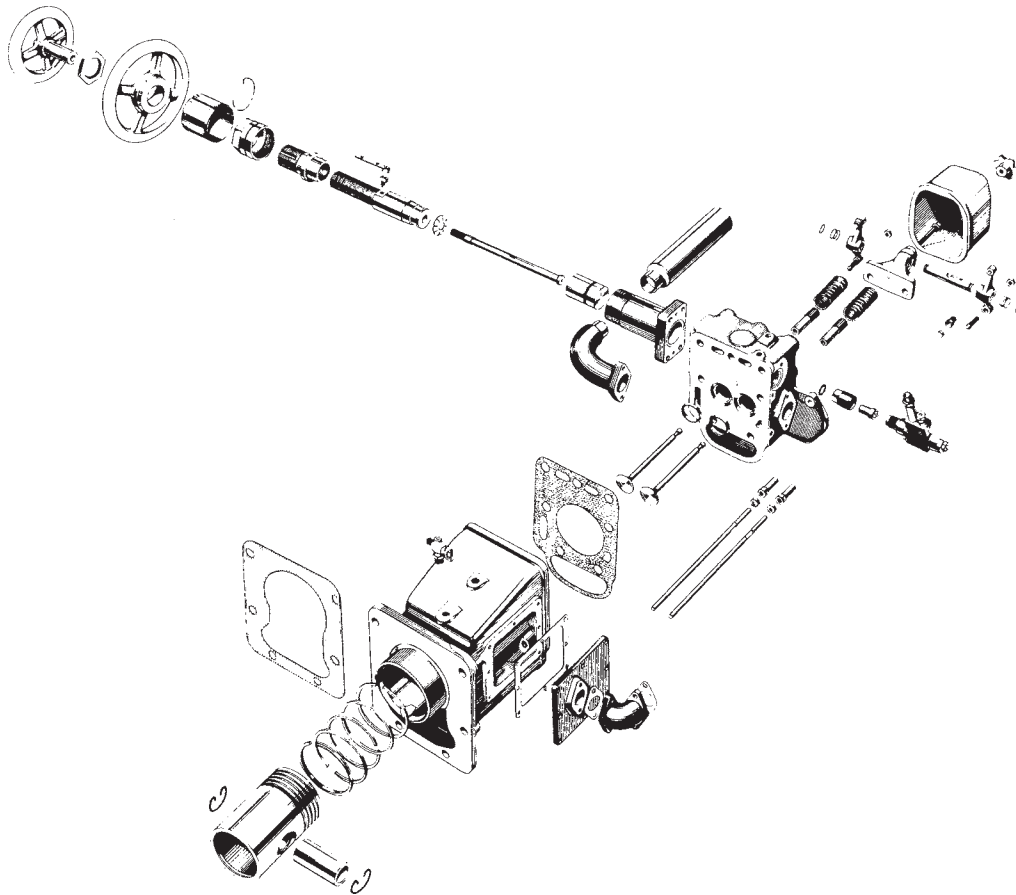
Exploded View of Cetane Cylinder and Head Assembly
